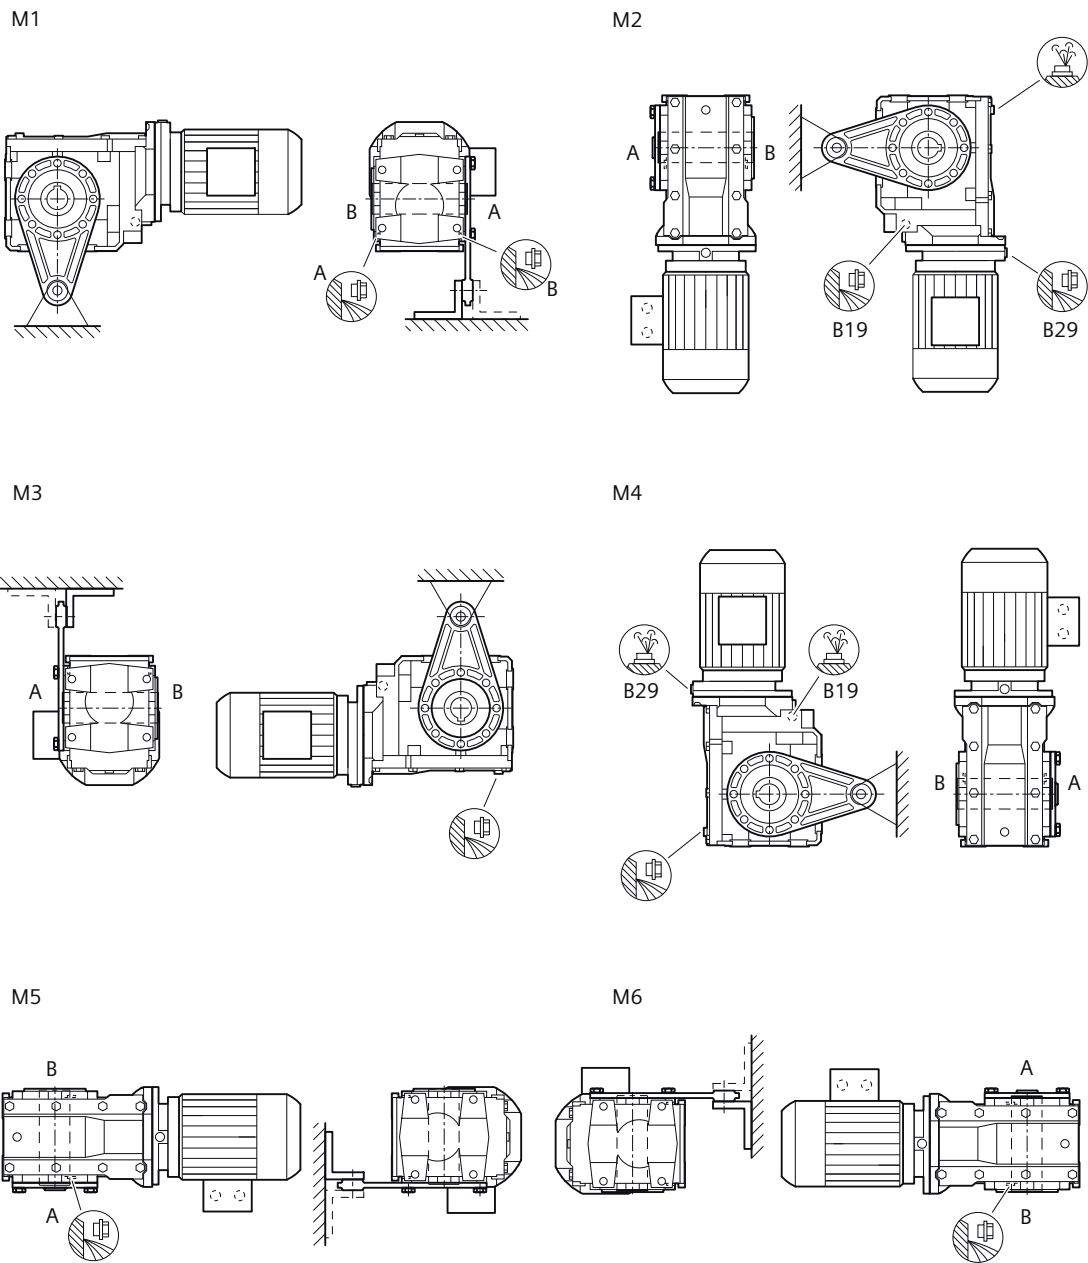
Mounting positions for bevel gearbox BAD shaft-mounted design, sizes 19 - 29
